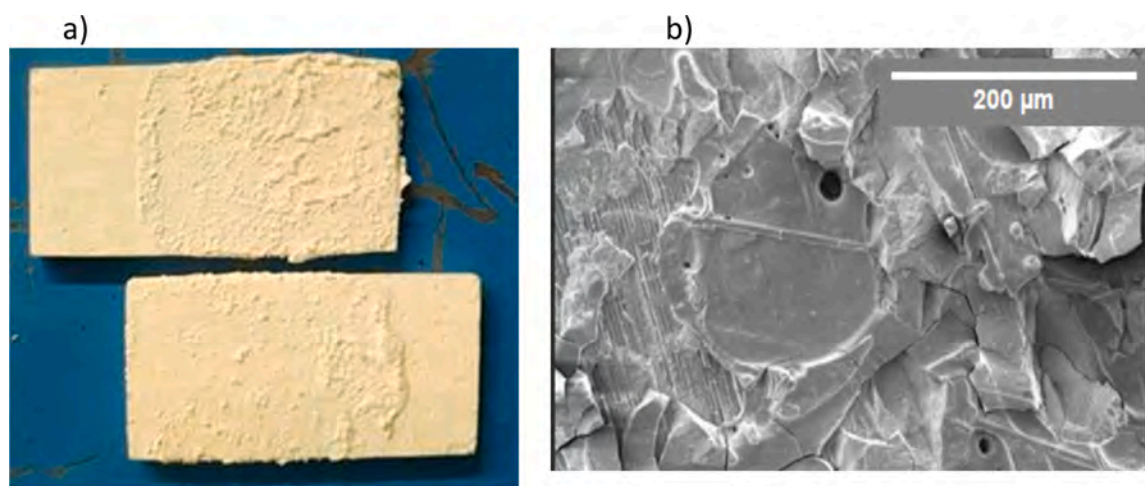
Fracture surface after mechanical test at 600 °C: visual appearance of the cohesive fracture (a) and SEM of the fracture surface (b): joined samples with 70 wt% alumina particles, 1 wt% alumina fibers, after curing and pyrolysis at 850 °C.
